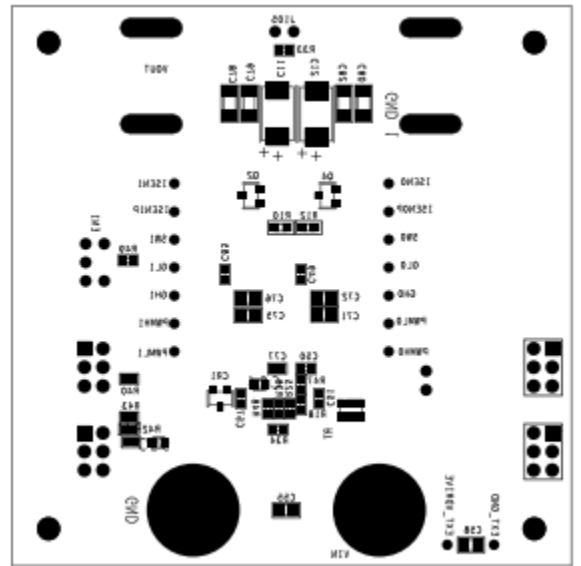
PCB - BOTTOM ASSEMBLY (TOP VIEW)
